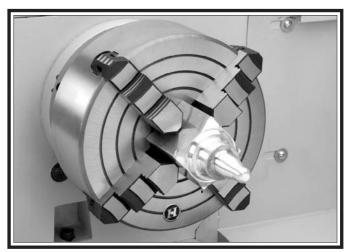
Example photo of non-cylindrical workpiece correctly mounted on the 4-jaw chuck.
